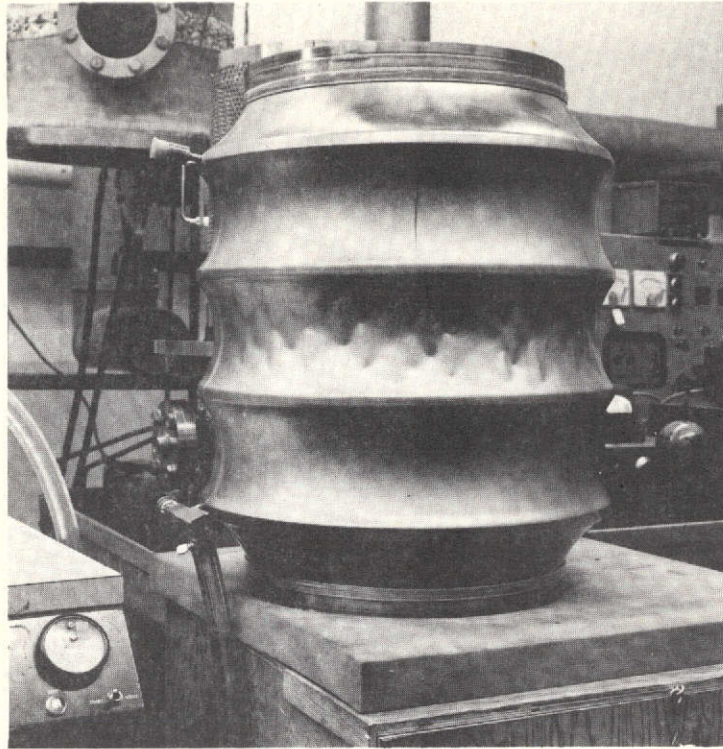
Assembly #1, Final Configuration, Under Full Vacuum
